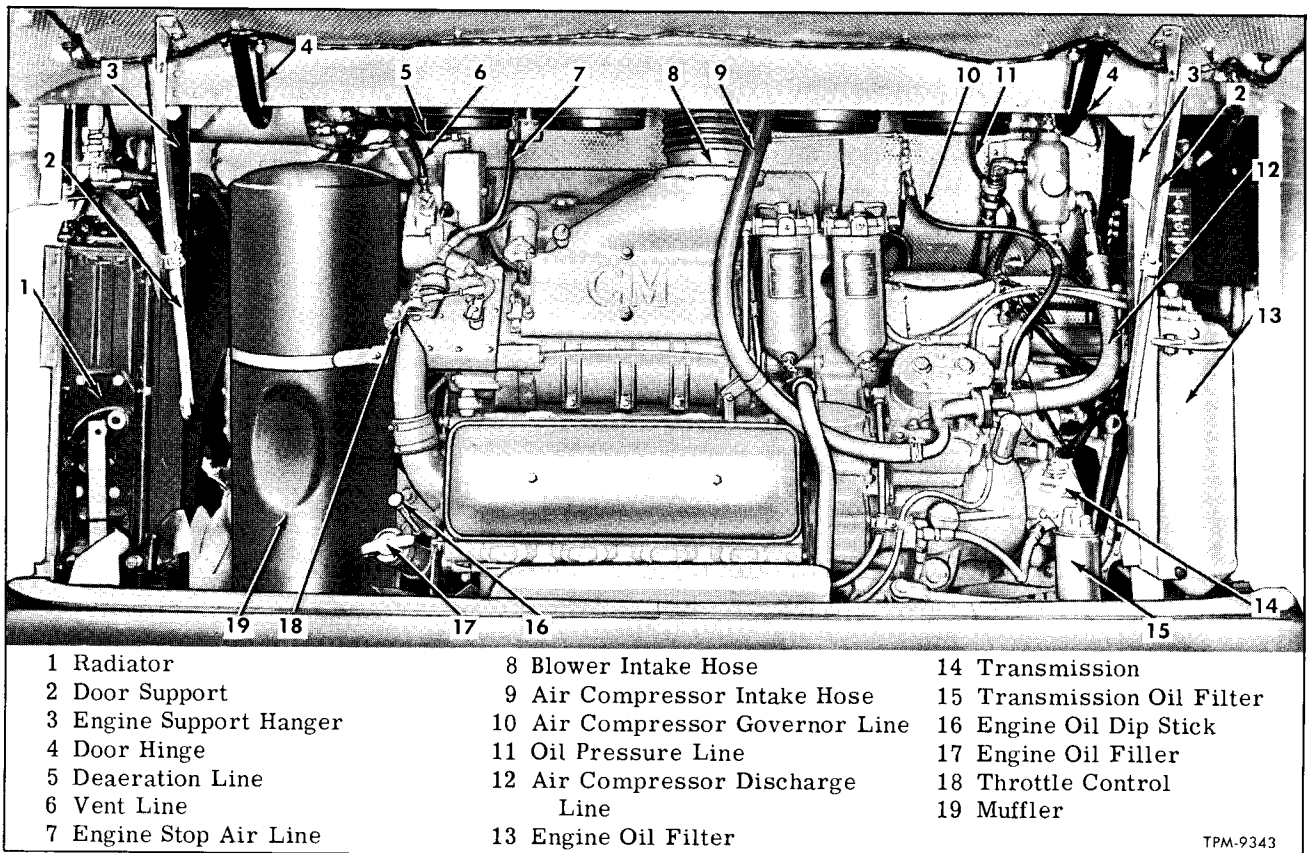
Power Plant Assembly Installed—8 Cylinder with Mechanical Transmission
